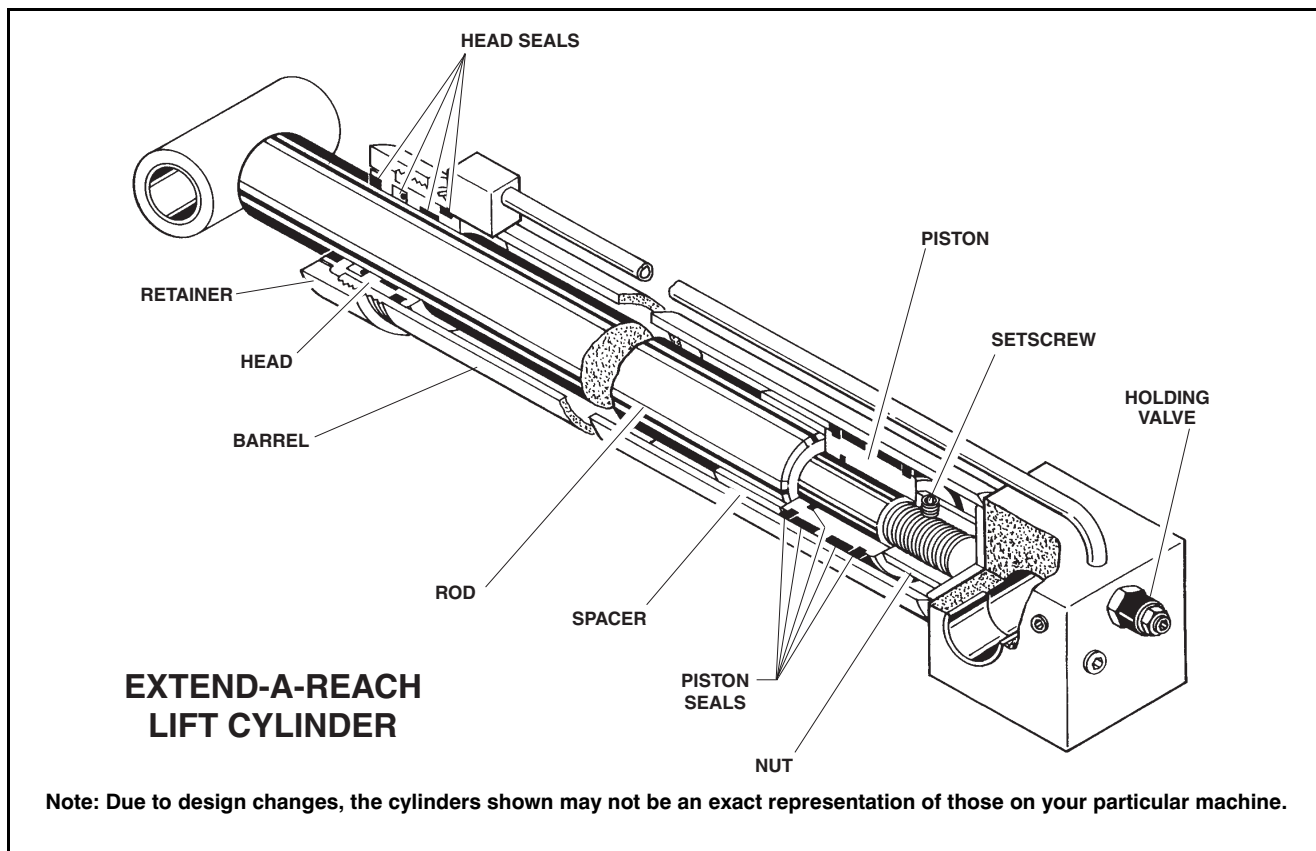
Typical Hydraulic Cylinders - Sheet 5 of 5
